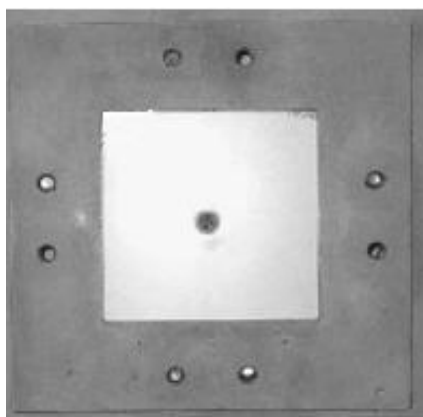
The schematic of test fixture and mounted specimen (140 mm×140 mm and 24 mm thick)
